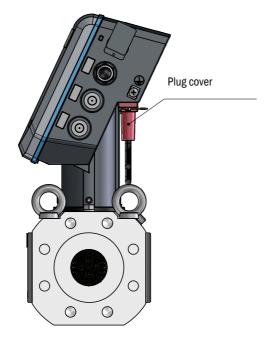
Tamper protection, plug cover for the external pressure and temperature sensors
